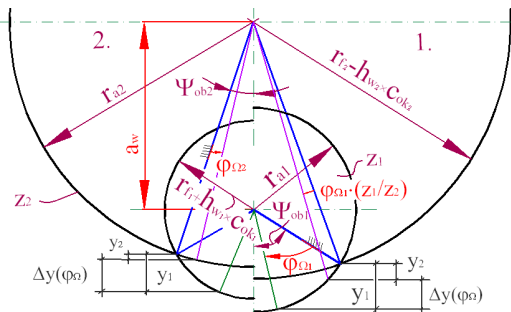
Geometric model for calculation the oil expel for internal gearing
